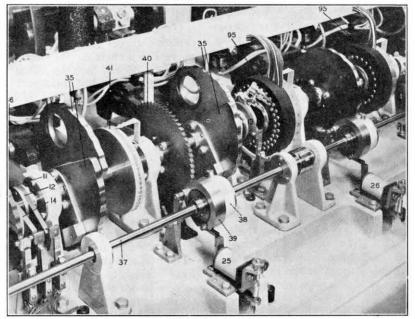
" MINUTES AND HOURS " CAM SHAFTS.
